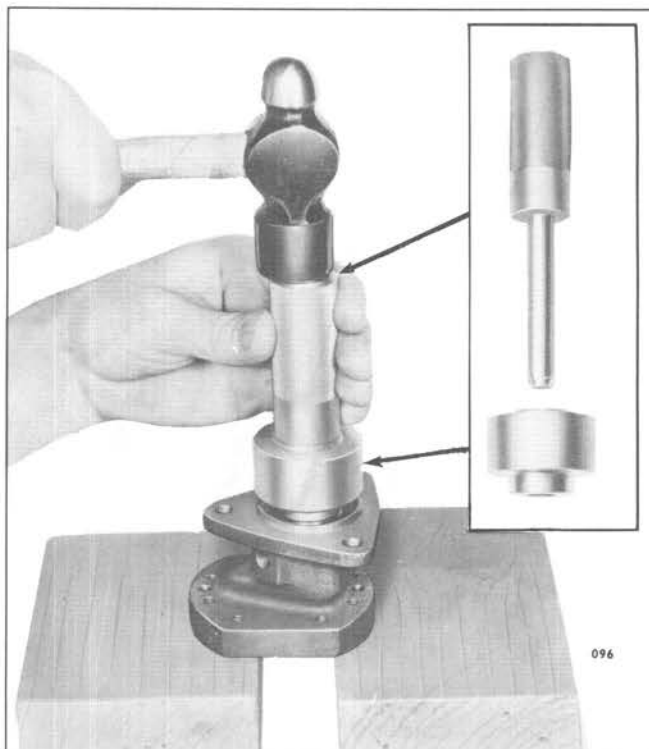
Installing Outer Oil Seal using Tools J 1508-8 and J 1508-9
